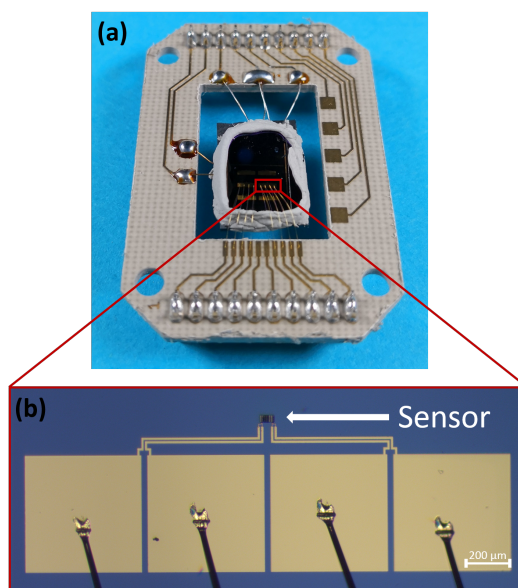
Final product of silicon based gas sensor fabrication. (a) Camera picture of the evaluation PCB with the attached gas sensor stack. The gas sensors itself are wire bonded (Au wires) to the PCB. (b) Optical microscope picture of a single gas sensor on the sensor stack. The gas sensor is made of the electrode system and the gas sensitive material (CuO thin film).
